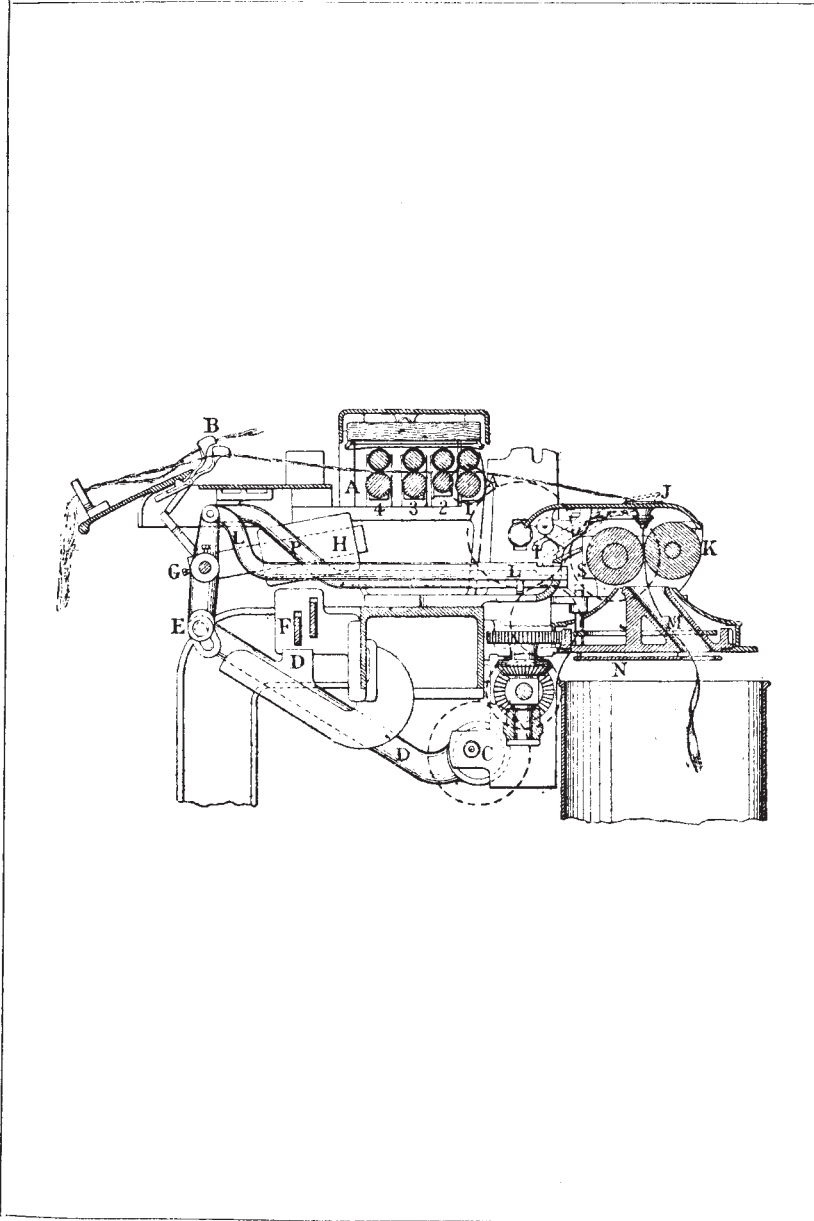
PLATT'S DRAWING FRAME, SHEWING FRONT AND BACK STOP MOTIONS AND CAN STOP MOTION.
